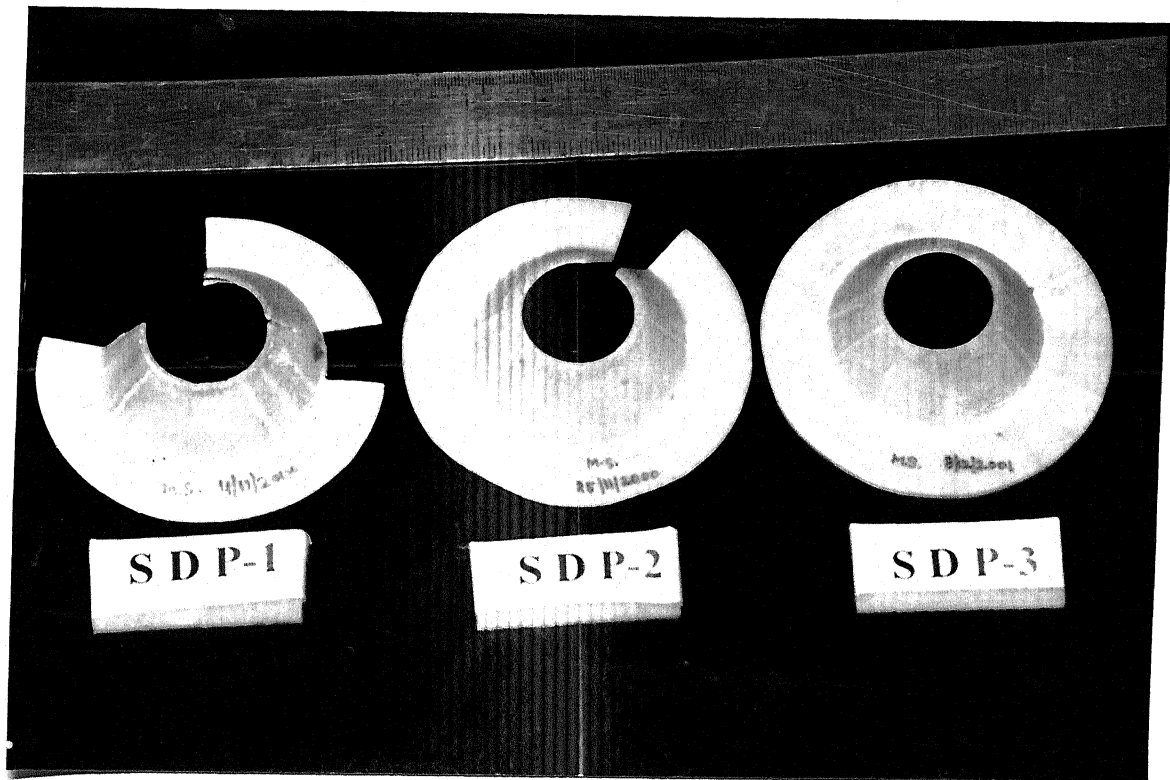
FRP products(cut portions indicates the parts cut for making burn-test specimen)
